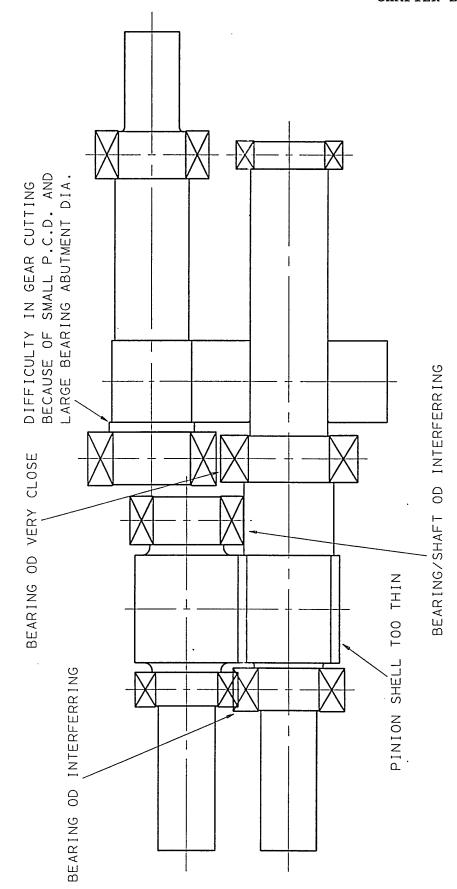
Layout of First Attempt Design for Cold Mill Box
